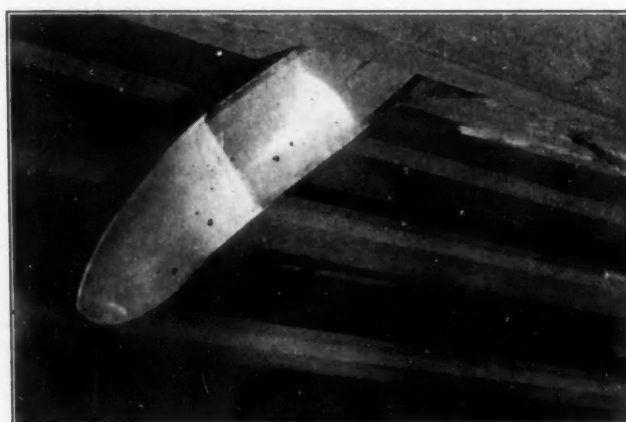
PROPELLER BLADE EMBEDDED IN ROOF AFTER FAILURE. This propeller consisted of two steel plates riveted to a forged hub. Destroyed after five min. at 1800 r.p.m.
